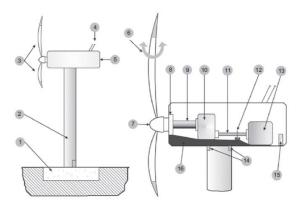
Components of WT: 1-base; 2-tower; 3-blades; 4-meteorological unit; 5-nacelle; 6-pitch system;7-hub; 8-main bearing; 9-low speed shaft; 10-gearbox; 11-high speedshaft; 12-brakesystem; 13-generator; 14-yaw system,15-converter, 16-bedplate. Drivetrain=9-11 [13].
